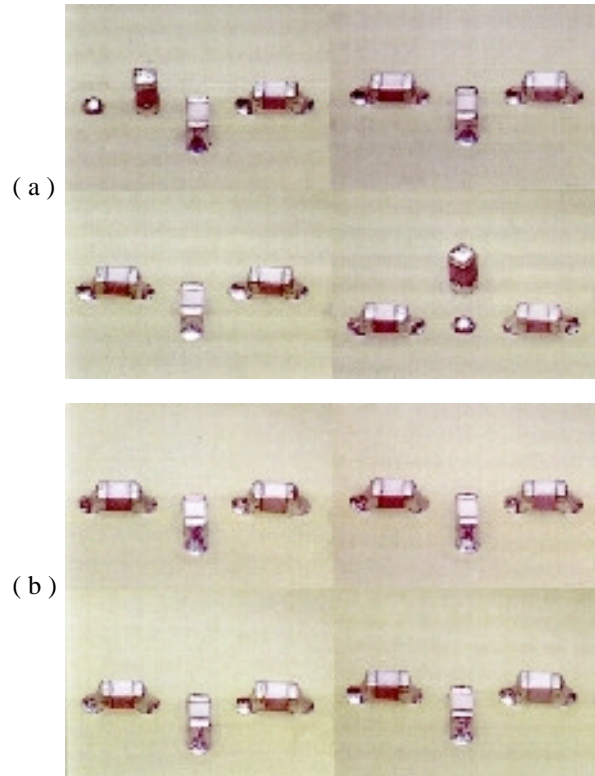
Photograph of sub-assembly alloy's solder paste after reflow
